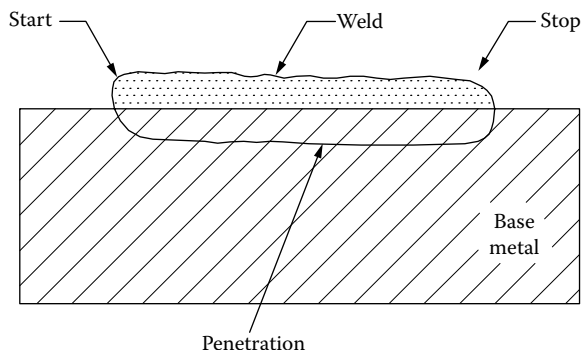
Beginning-and-end defect of welding of austenitic SS. (From Vackar, B.K., *Weld. Design Fabr.*, June, 86, 1977.)
